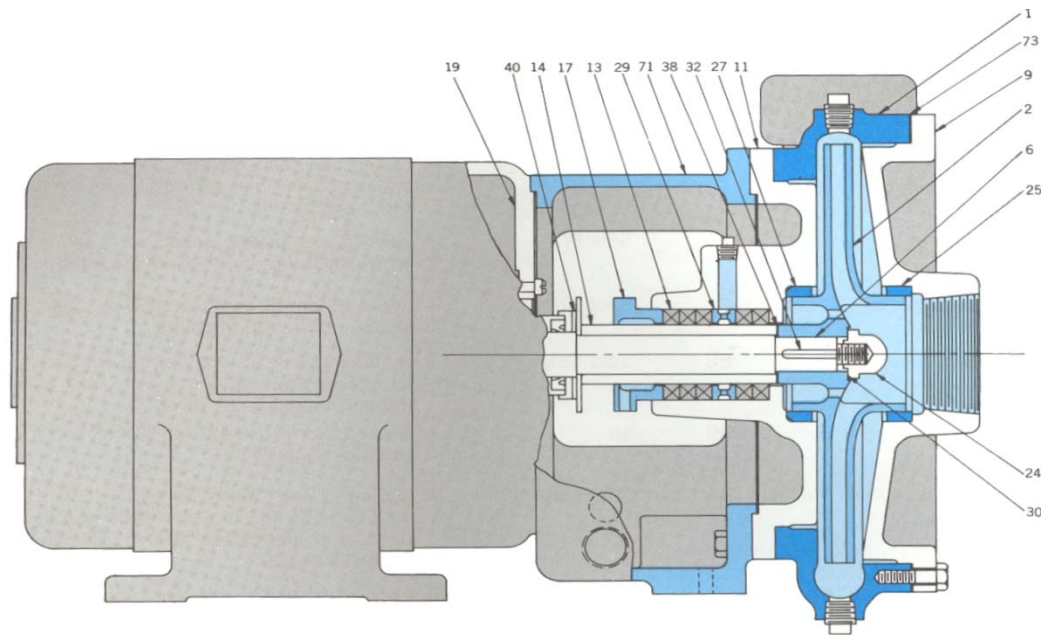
OVERHUNG IMPELLER, CLOSE COUPLED, SINGLE STAGE, END SUCTION
